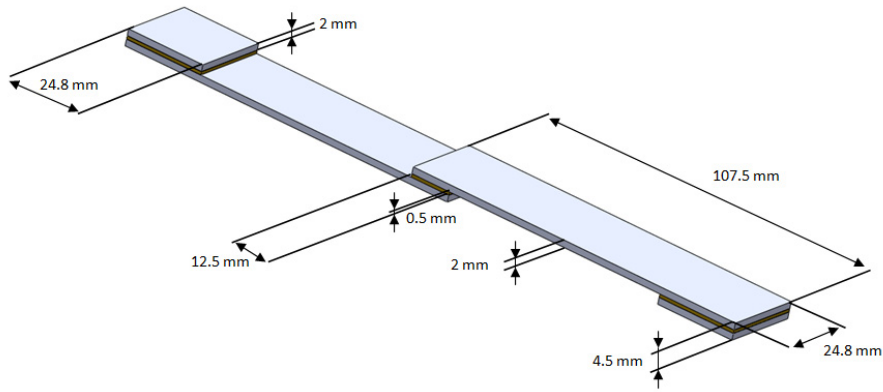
SLJ specimen geometry (all dimensions in mm).
